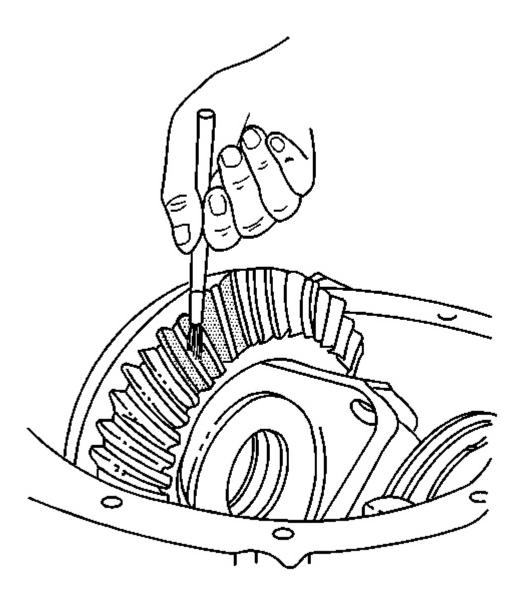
Applying Gear Marking Compound To Ring Gear Teeth Courtesy of GENERAL MOTORS CORP.
